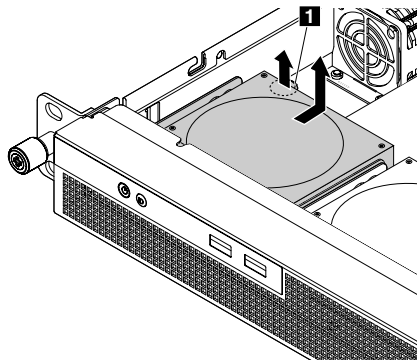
Removing the 2.5-inch hard disk drive together with the bracket
